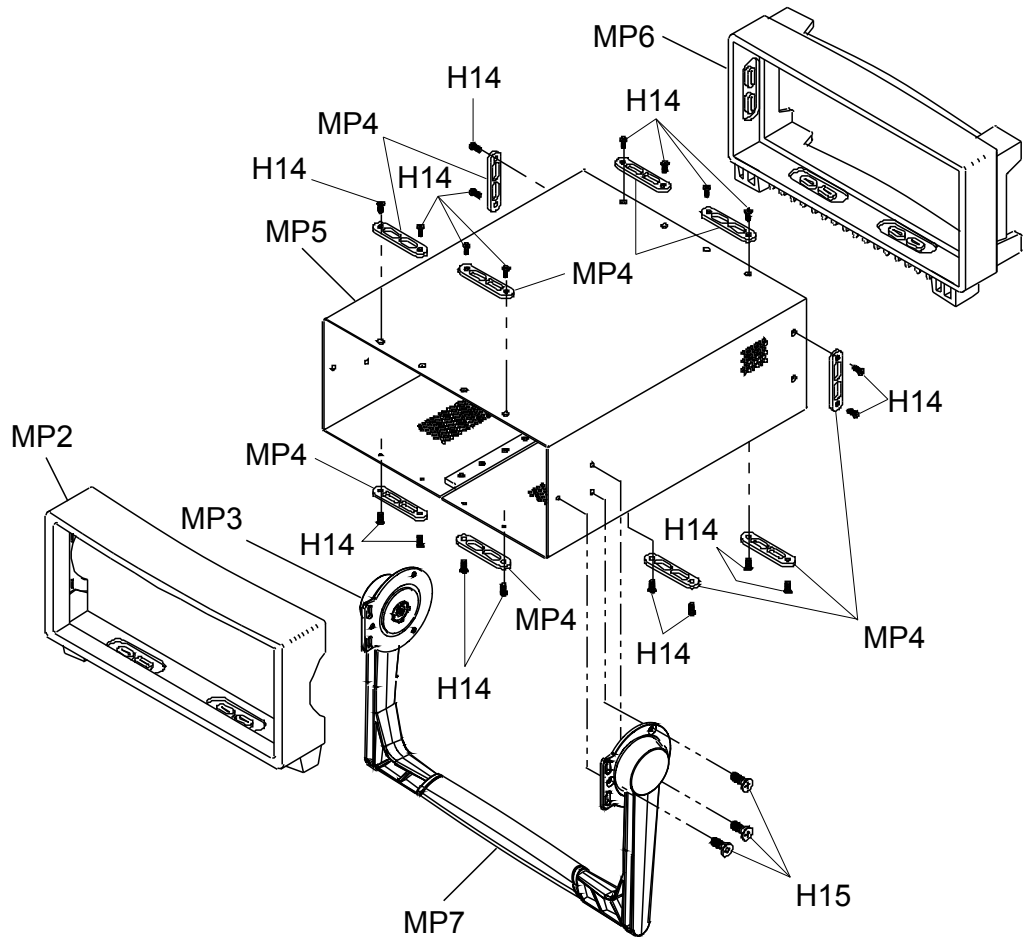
Keysight 53147A/148A/149A Exploded View – Cabinet and External Parts
